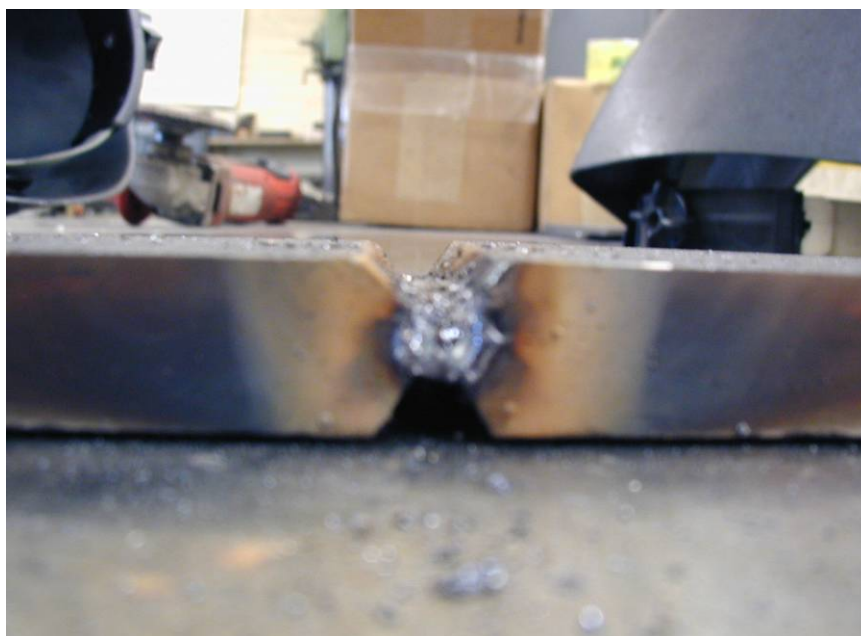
Weld Detail after Initial Root Pass on Testing Specimen
